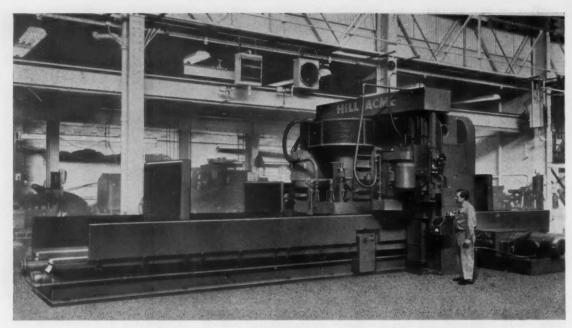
Huge surface grinder with hydraulically operated table recently built by Hill Acme Co.
